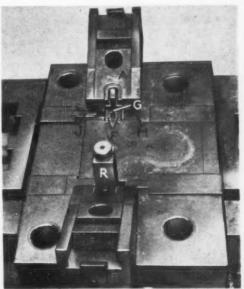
View of the Moving Die for the Brake Magnet Assembly Showing a Pair of Magnets F, which have been Loaded with the Aid of the Special Holder R
